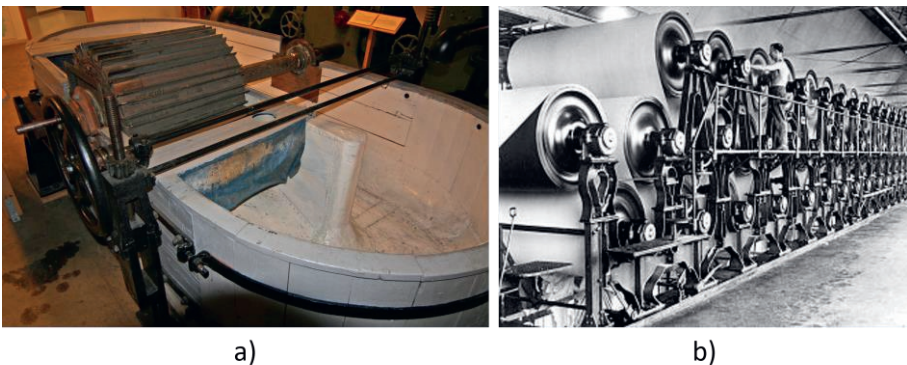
Machines used for the pulp and paper industry: a) Hollander beater, invented in 1680 ([https://en.wikipedia.org/wiki/Hollander\\_beater](https://en.wikipedia.org/wiki/Hollander_beater)) and b) the Fourdrinier machine invented in 1806 (<https://www.floridamemory.com/items/show/66958>).
